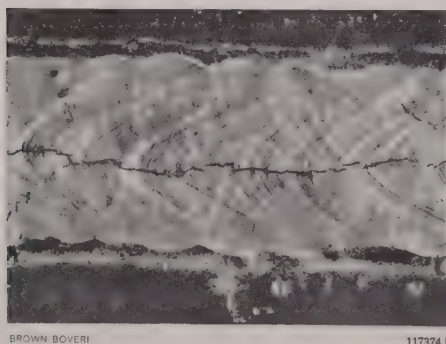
Longitudinal cracks in the top layer of a weld
